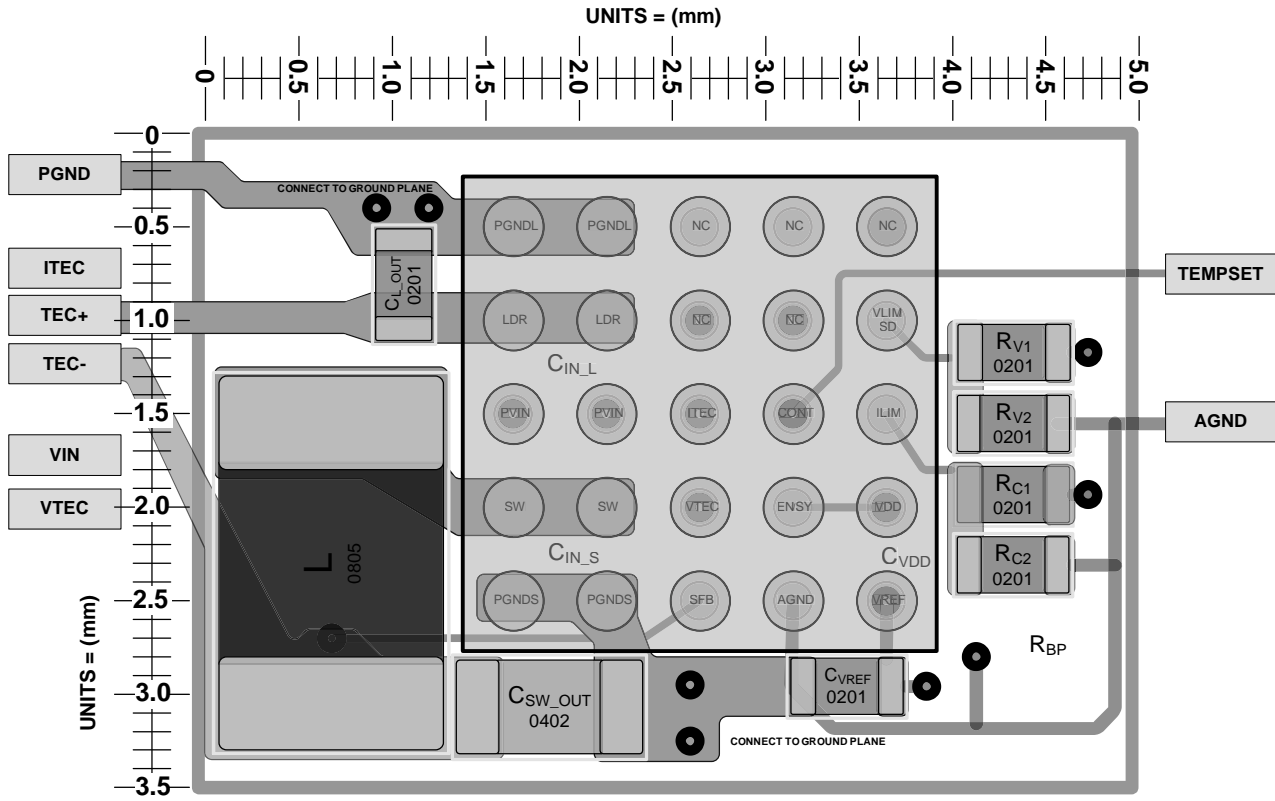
Example PCB Layout Using Two Layers (Top Layer Only)
